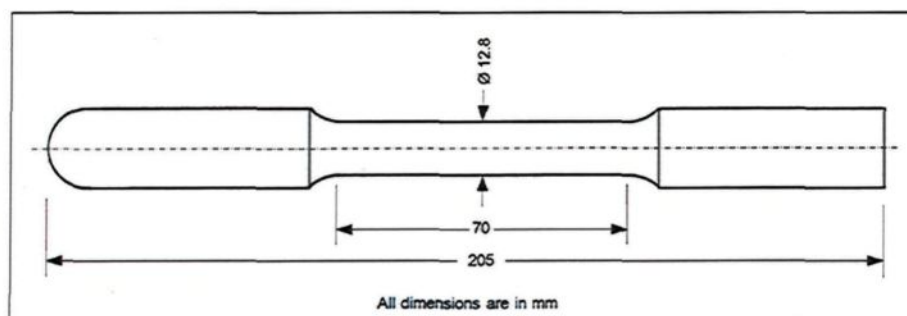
The dimensions of the tensile test bar used according to ASTM specifications.
